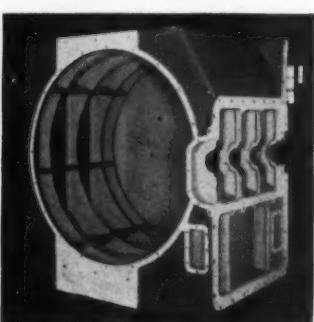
Same blower housing as that shown at left cost \$222 less as a casting than as a welded assembly.
